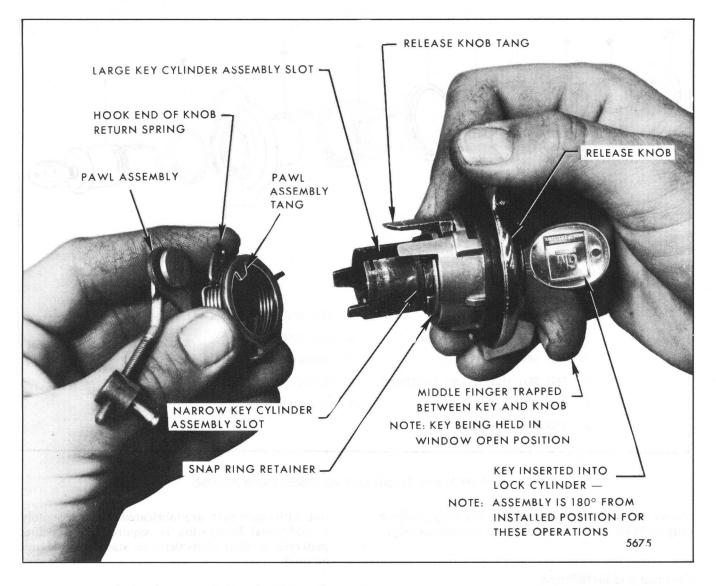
Loading Pawl - Spring Assembly to Key Cylinder
